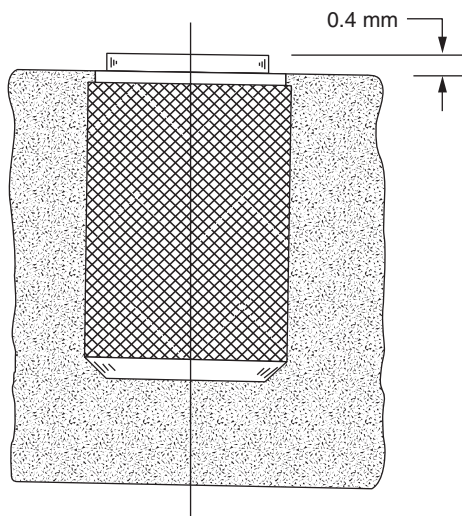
Inserts moulded in bosses should have enough compound around them to prevent cracking. Minimum wall thickness can be obtained from Table 1.3.
